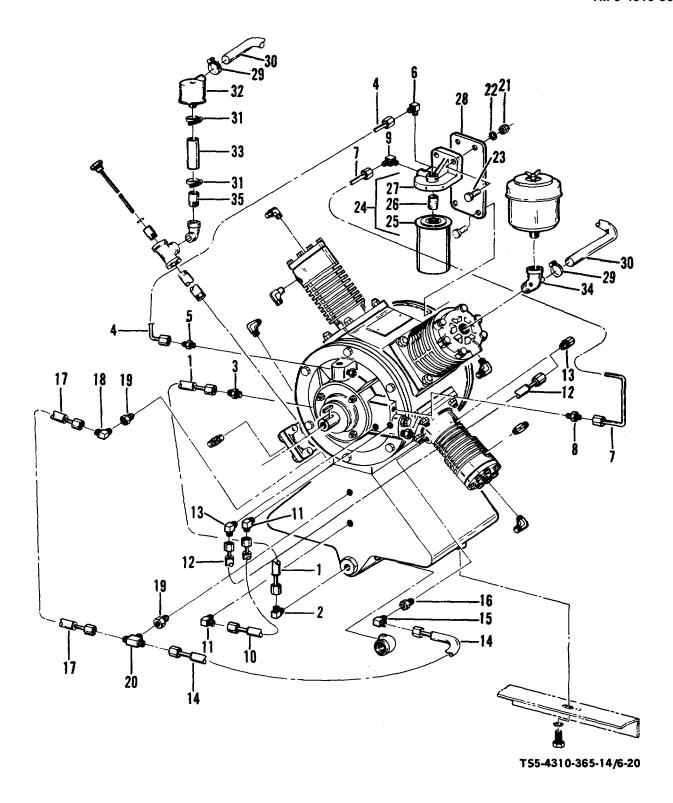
Compressor oil lines and fittings, oil filter, and crankcase breather
